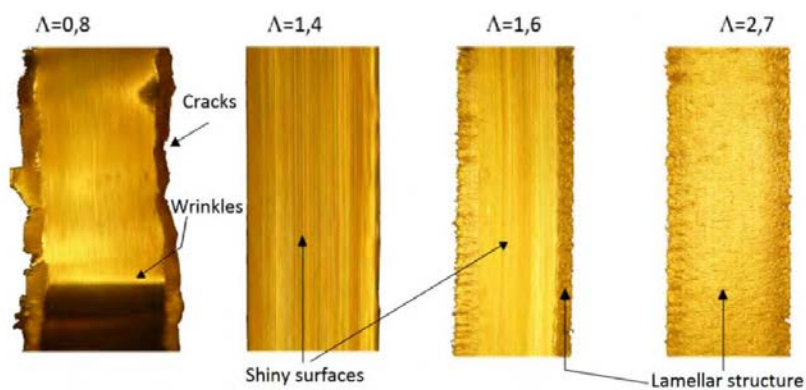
Extruded chips morphology for different tool-shoe gap. [3].
